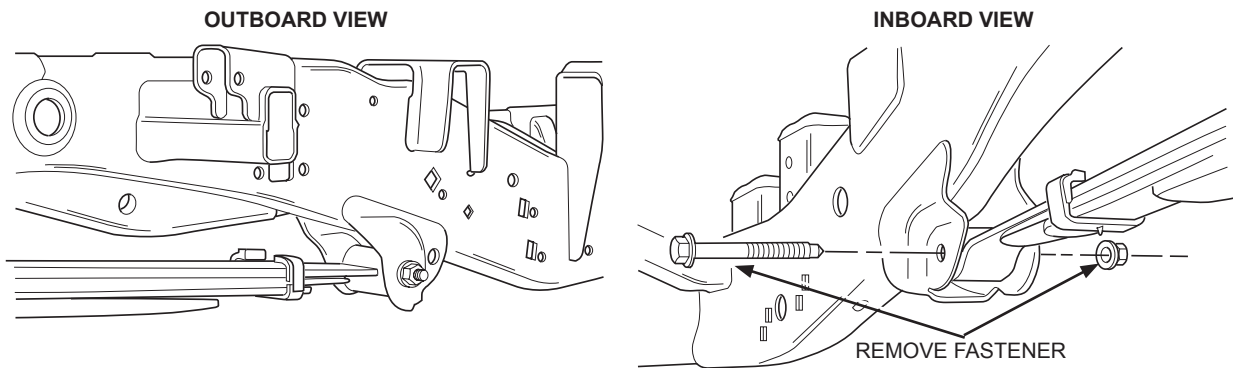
VIEW OF REAR SPRING ASSEMBLY IN THE REAR SPRING FRONT HANGER BRACKET AND WHICH FASTENER TO REMOVE. RH SHOWN, LH IS SYMMETRICALLY OPPOSITE
